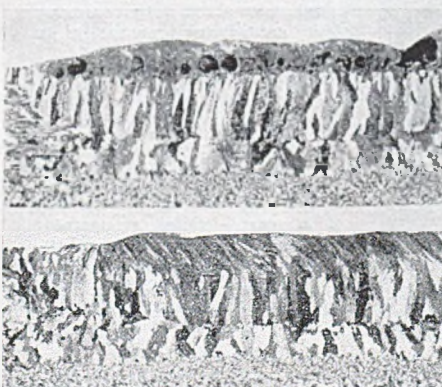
Unalloyed aluminium deposited by arc welding on to the surface of castings also in unalloyed aluminium. Cross sections etched. Upper illustration: Without preheating. Lower illustration: With preheating. (Equivalent magnification in reproduction = x 3).
